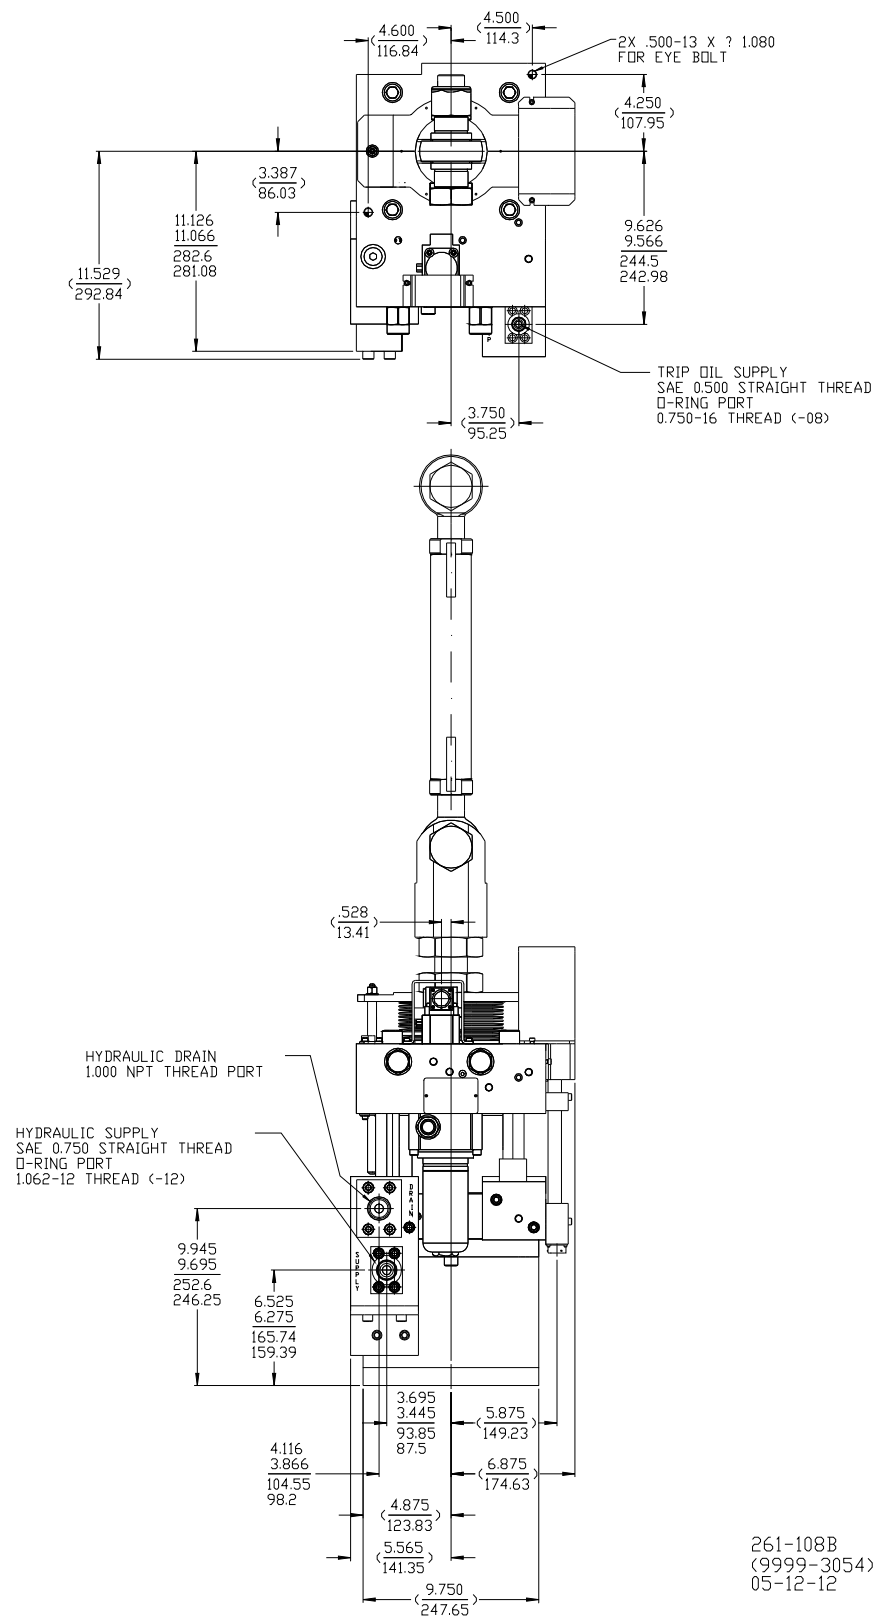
7E IGV Actuator with Hydraulic Trip (front and top views)
